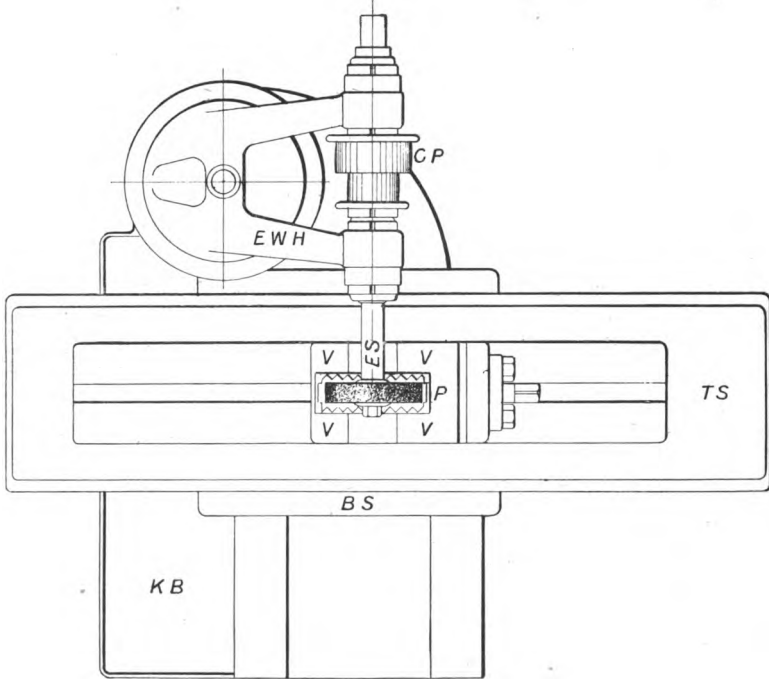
"Ward" Machine. Plan showing Emery Wheel surfacing end of Press Cutting Punch.
